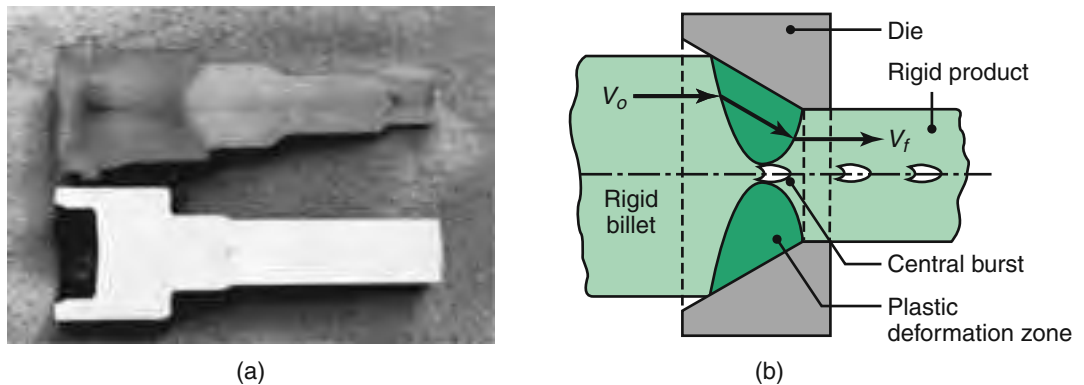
(a) Chevron cracking (central burst) in extruded round steel bars. Unless the products are inspected, such internal defects may remain undetected and later cause failure of the part in service. This defect can also develop in the drawing of rod, of wire, and of tubes. (b) Schematic illustration of rigid and plastic zones in extrusion. The tendency toward chevron cracking increases if the two plastic zones do not meet. Note that the plastic zone can be made larger either by decreasing the die angle, by increasing the reduction in cross section, or both. *Source:* After B. Avitzur.
